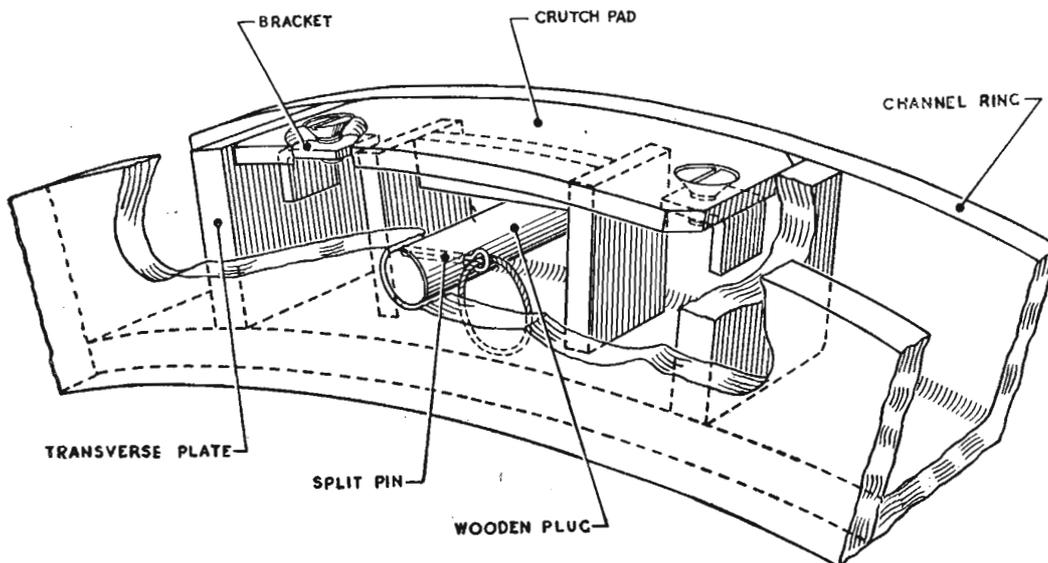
Broken perspective view showing attachment of crutch pad to channel ring
